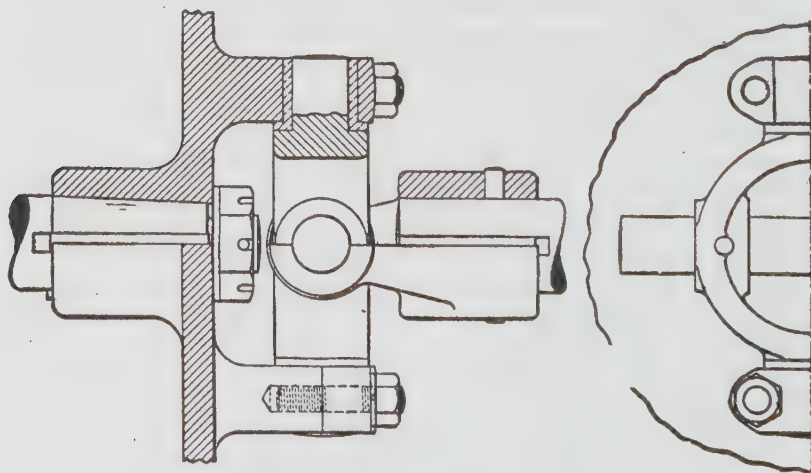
INTERNAL RING TYPE OF JOINT.
